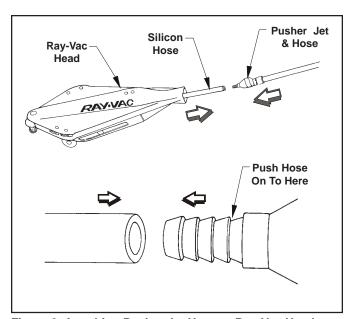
Attaching Pusher Jet Hose to Ray-Vac Head
